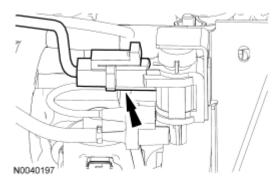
Locating AIR Valve Electrical Connector Courtesy of FORD MOTOR CO.
